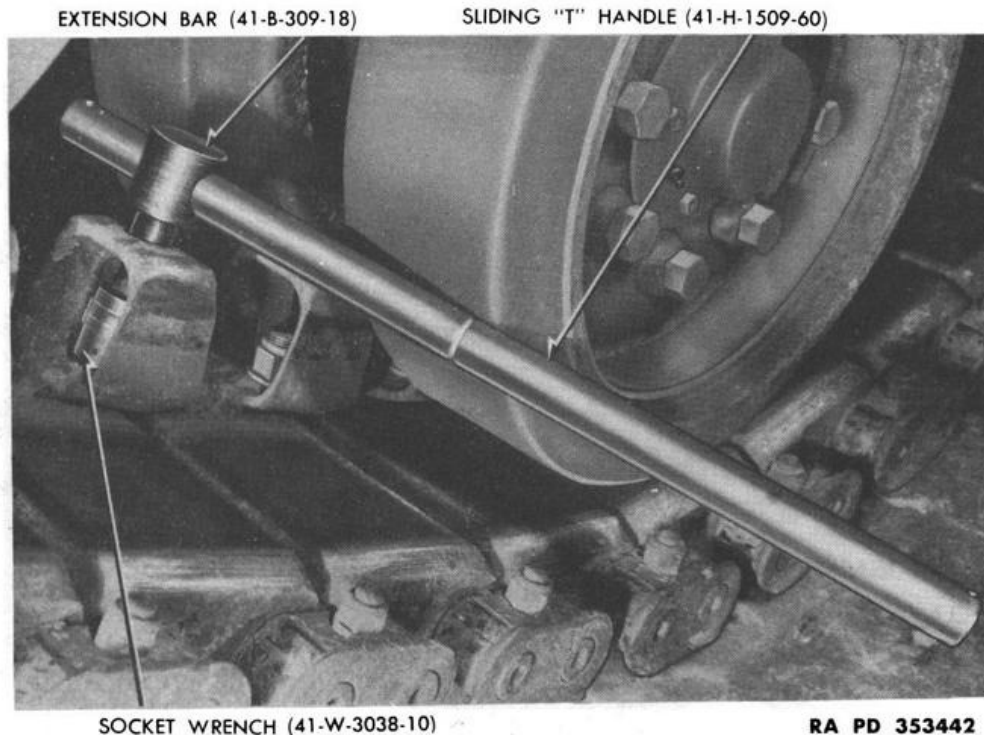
Removing center guide bolt and nut with special socket wrench and extension bar.
